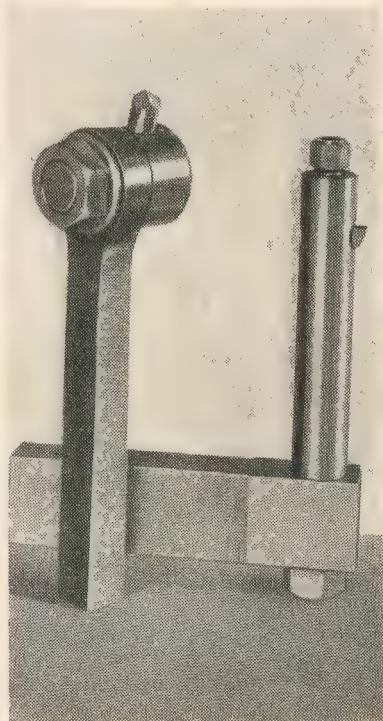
A swivelling toolholder; Right, a keyway-cutting tool
